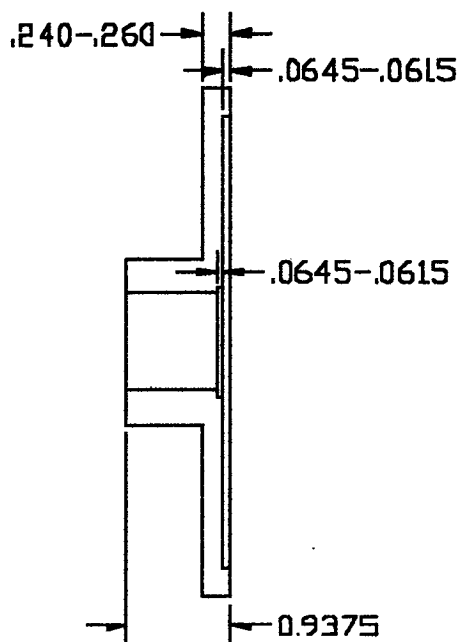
Dimensioned drawing of motor cover, cut-away view.
